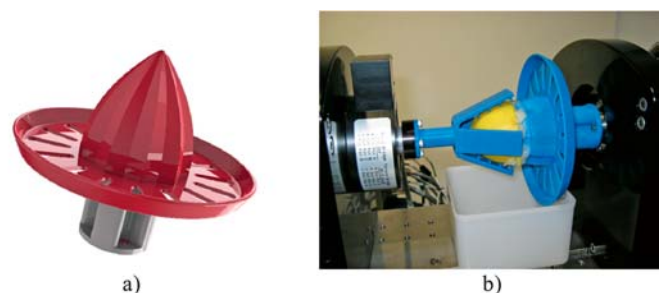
Orange juice squeezer; a - CAD shape and b - realization of an instrumented squeezer using prototyped components (in blue)
